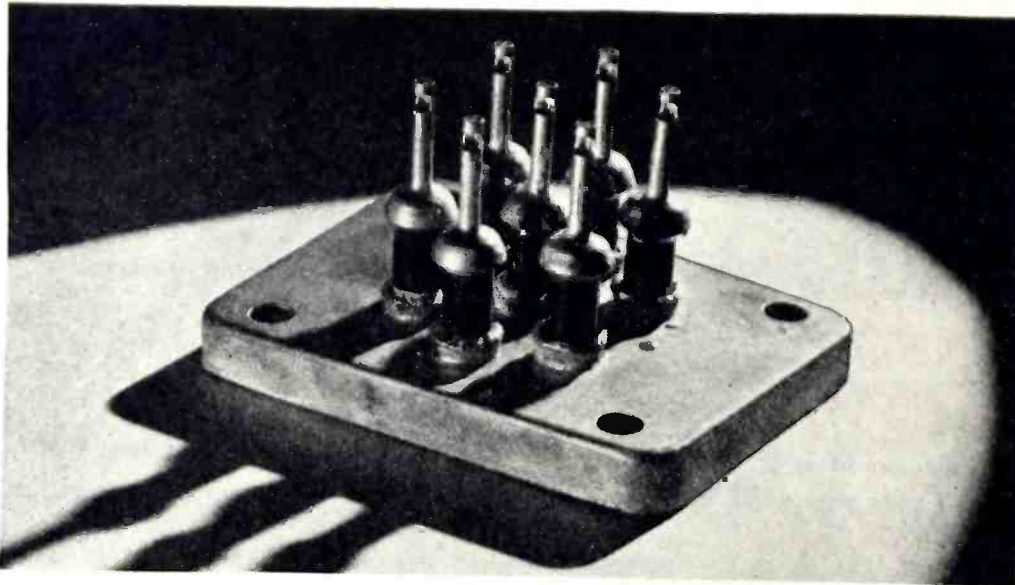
Transformer cover plate assembly using solder-seal porcelain bushings.
